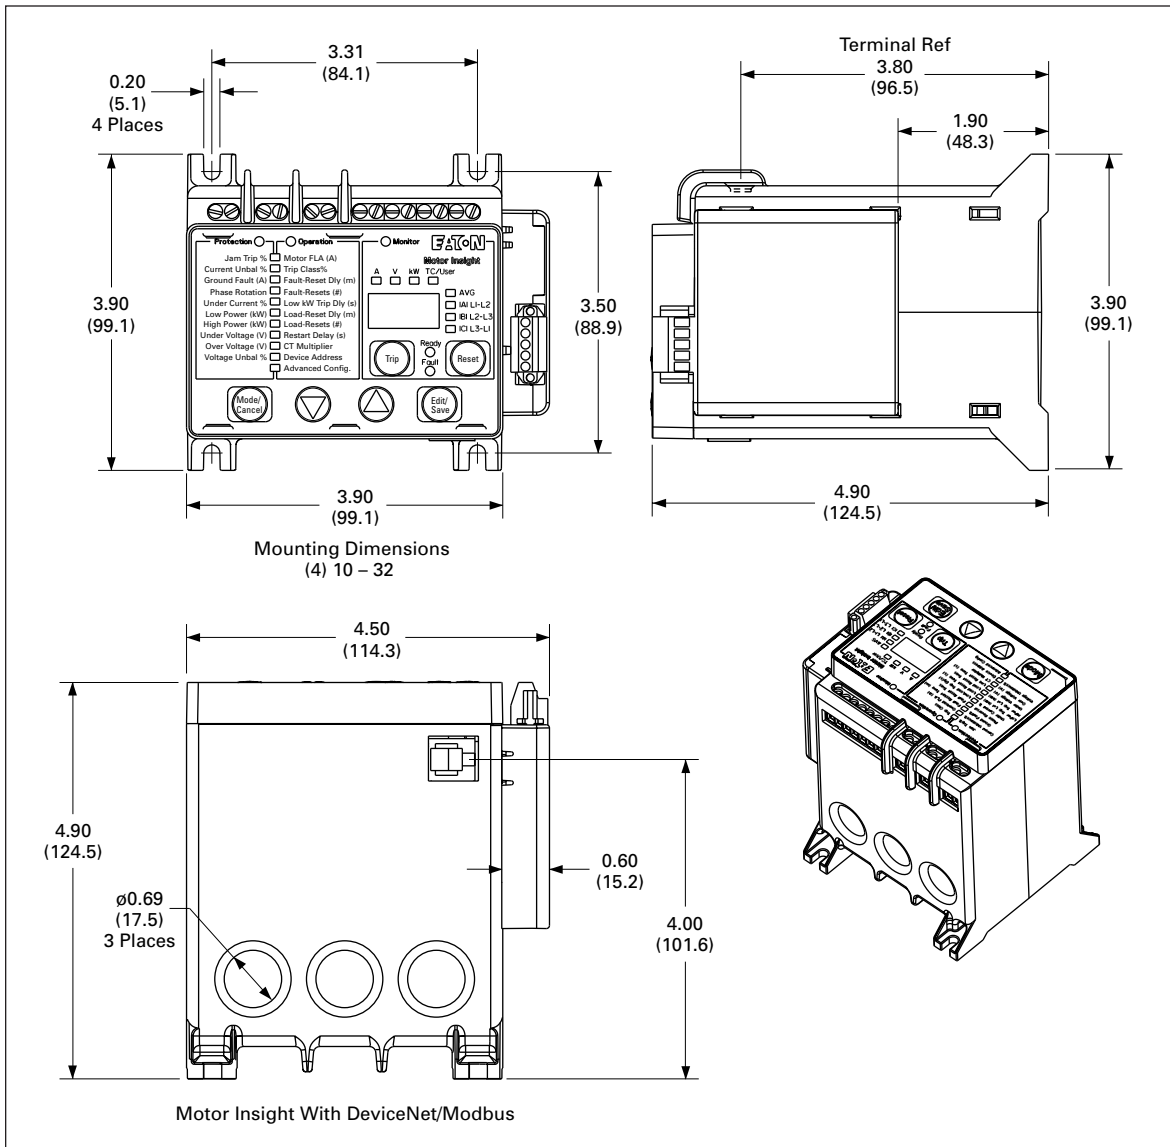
Motor Insight With DeviceNet™/Modbus® (B10-9113) Dimensions
